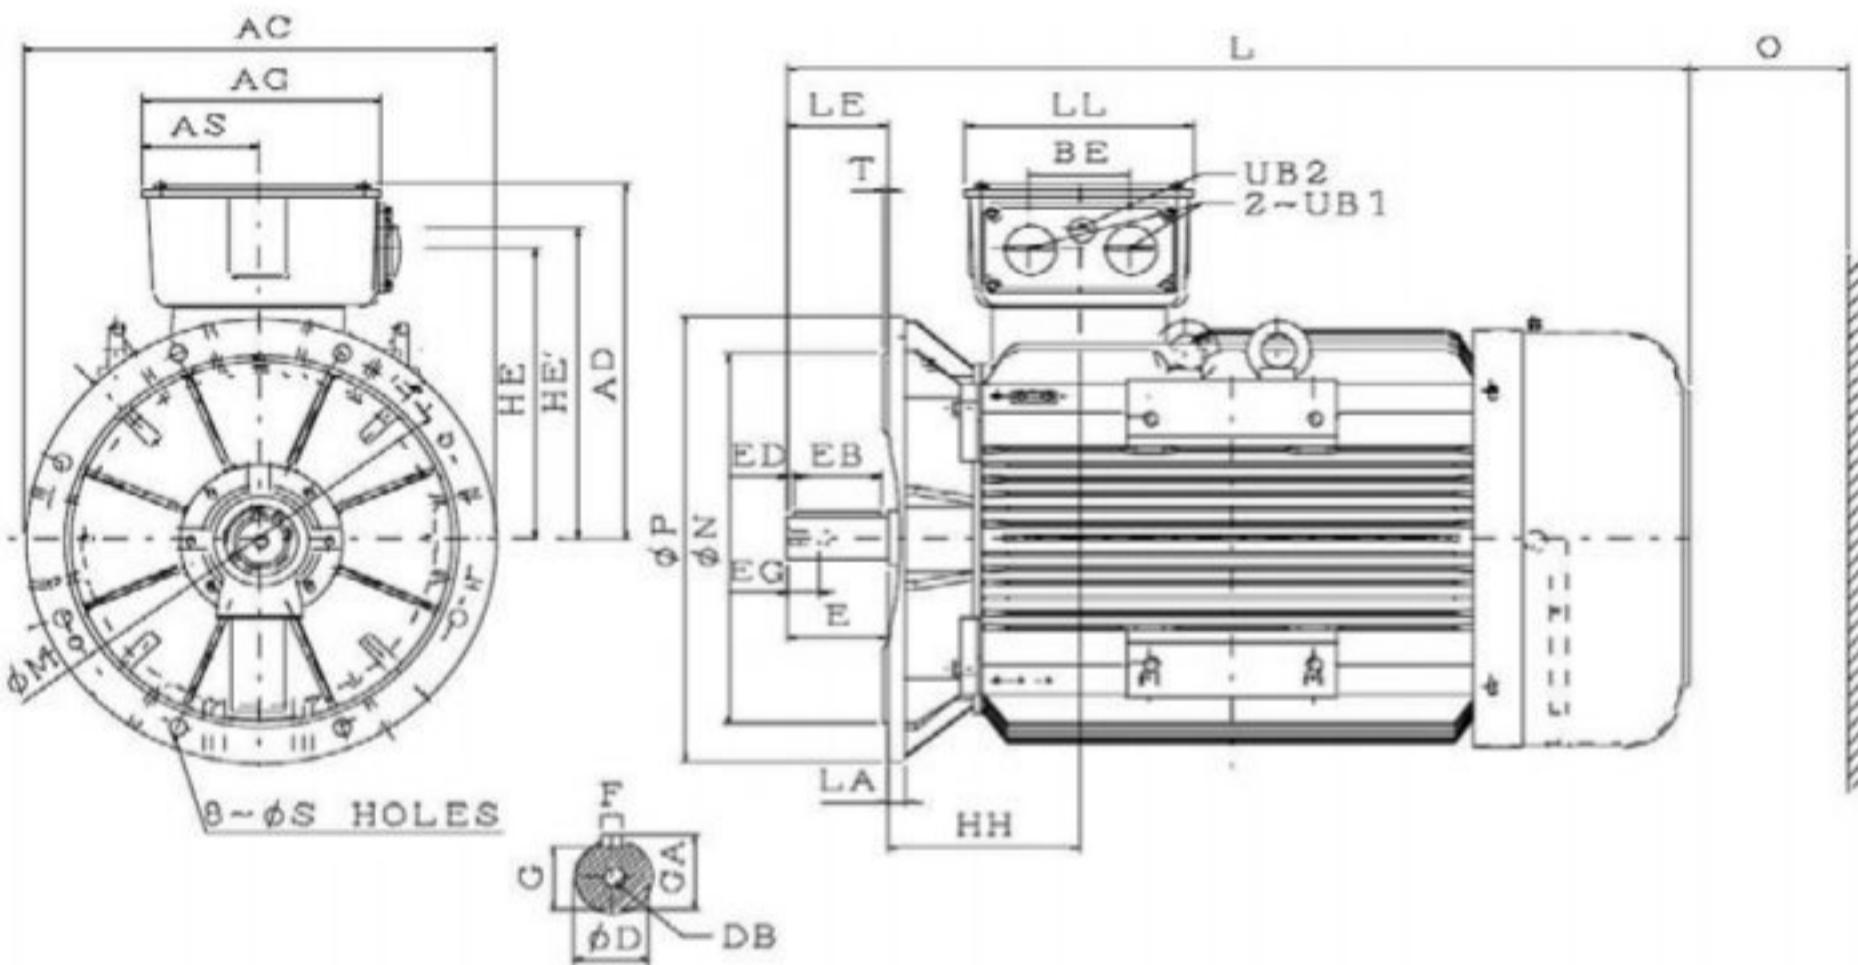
Outline drawing of cast iron design, flange version, mounting B5, frame size 315
